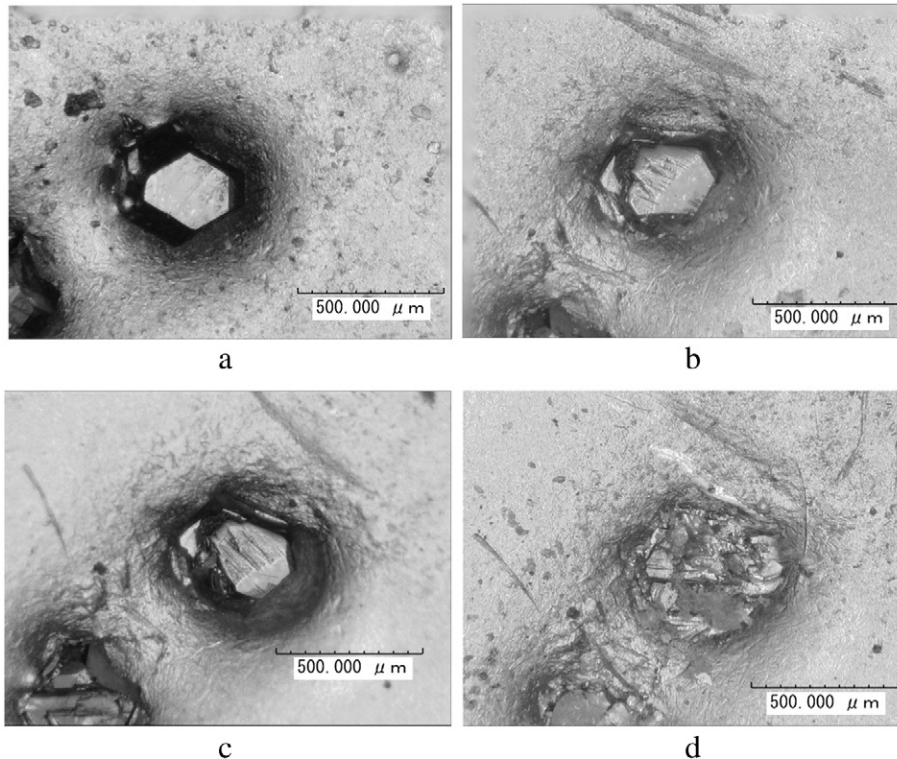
The morphological change of a single diamond grain. a- overall morphology; b- wear-away morphology; c- Micro-fractured morphology; d- Macro-fractured morphology.
